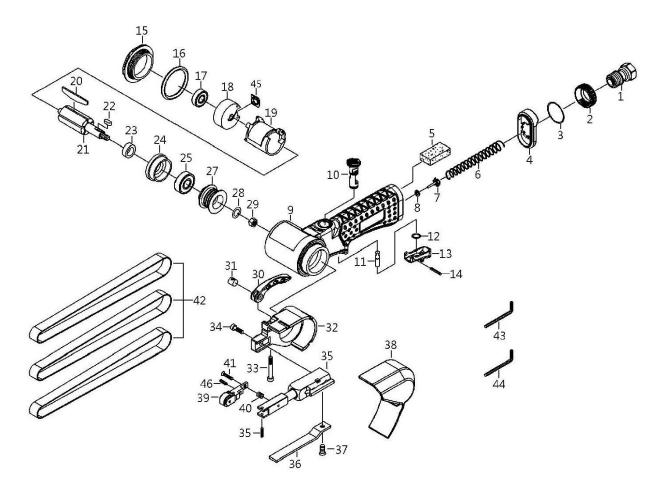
Spare parts drawing BS-C 10 PRO VS
